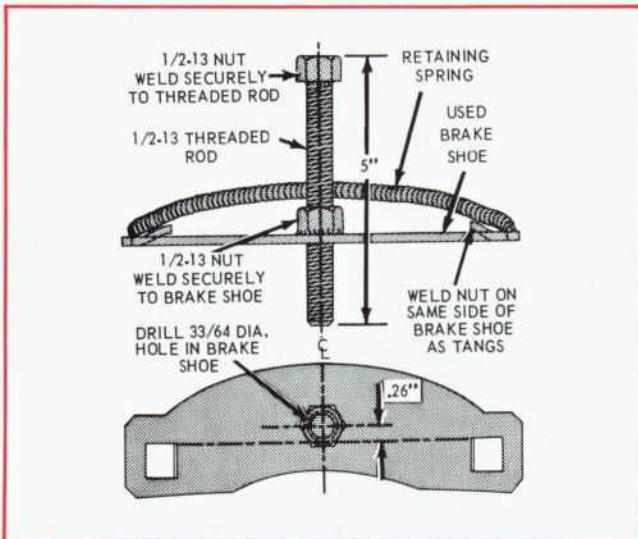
Here are the dimensions for making a piston retracting tool locally. The spring is needed to hold the special tool to the caliper as it is being used.
